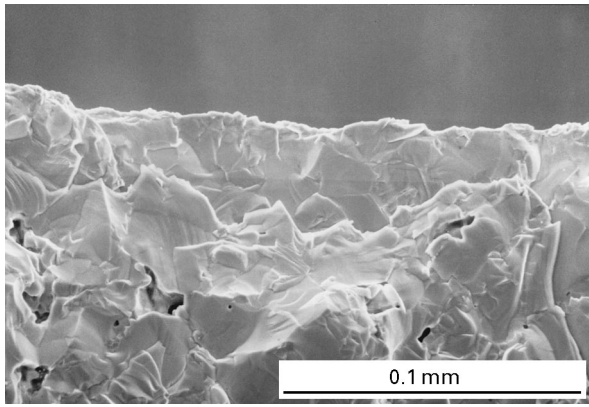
Scanning electron micrograph showing the fracture-initiating machining defect in 20 vol % SiC-MoSi₂ composite.
